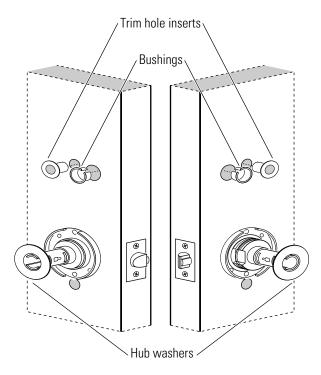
Reinstalling the bushings, trim hole inserts, and hub washers (B.A.S.I.S. Lock shown)
